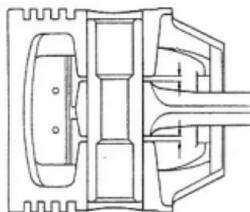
Piston & Connecting Rod Assembly G1571
